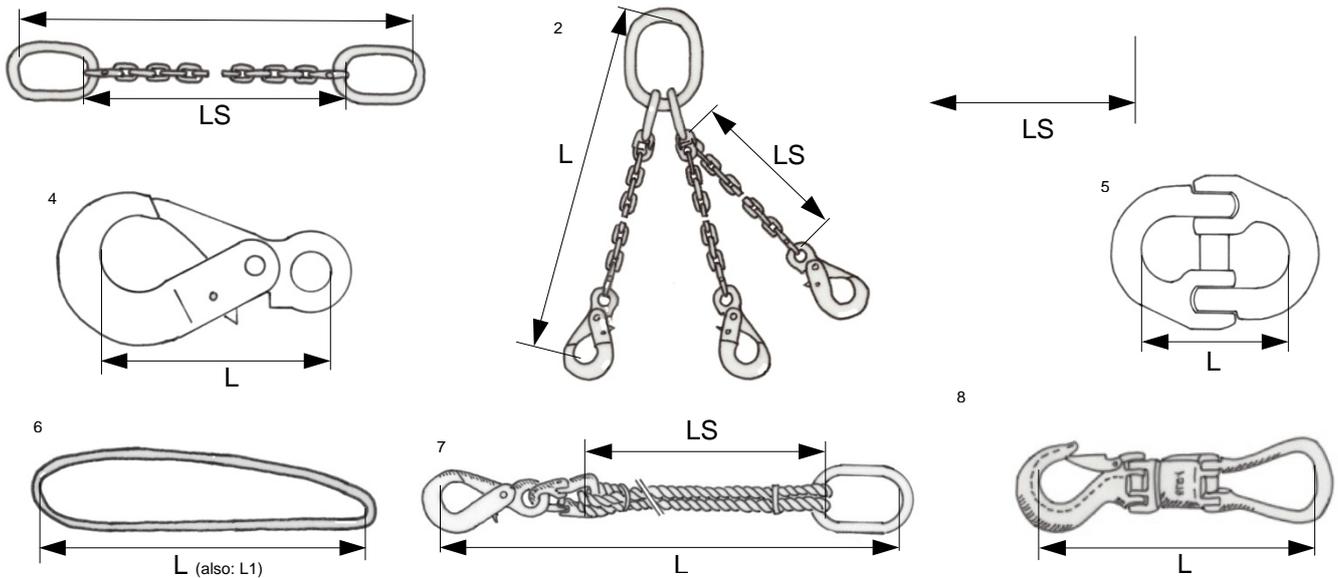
Round steel chain; Fig. 2 Three-leg sling; Fig. 3 Rope; Fig. 4 Safety hook; Fig.5 Connecting link (Connex); Fig. 6 Round sling; Fig. 7 Shock absorber (here without sheathing); Fig. 8 Load element (SLE) consisting of several parts, with integrated low-torque swivel.
